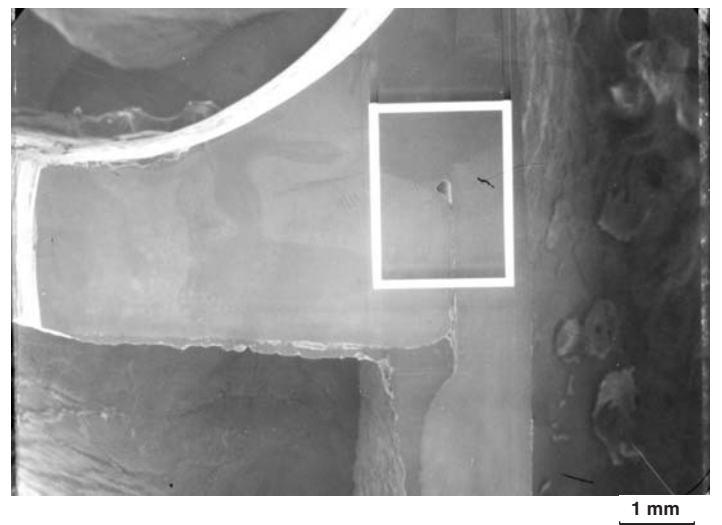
SEM photograph showing a crack emanating from the weld toe at the starboard lug
